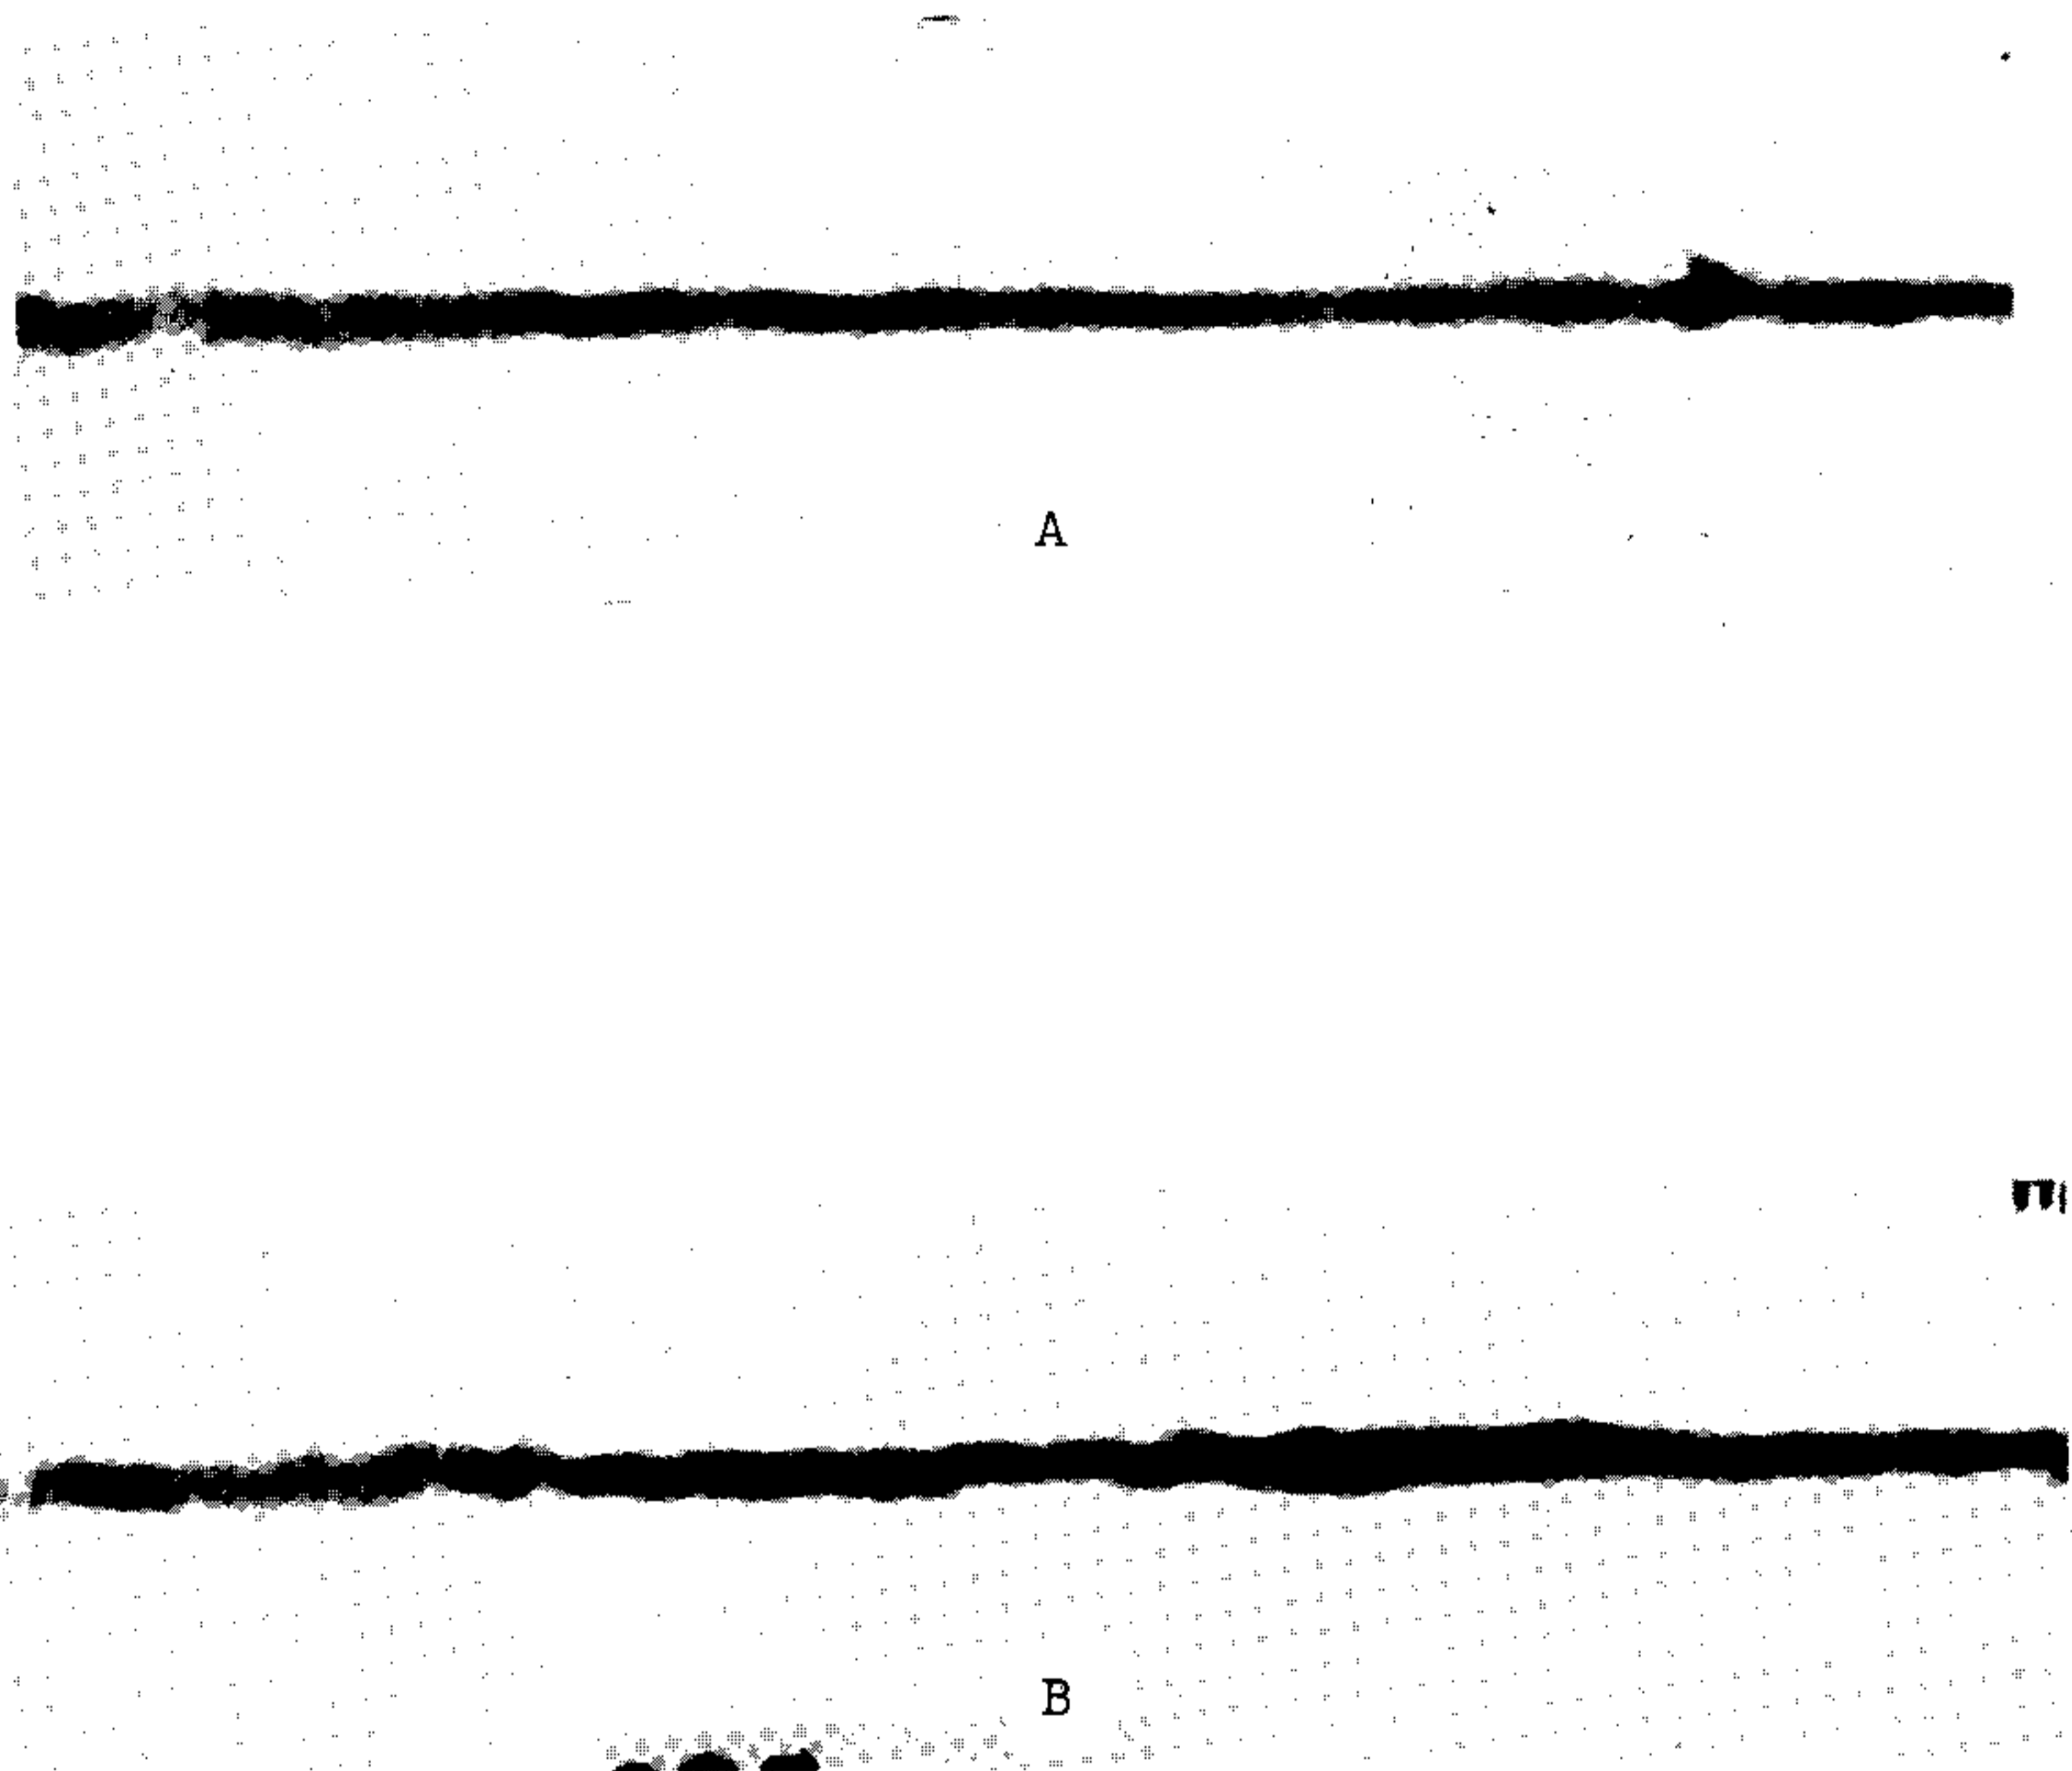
Radiographs of Manual Tungsten Arc Welds
